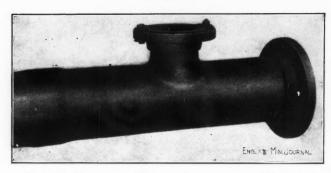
PIPE AND NIPPLE JOINT AFTER WELDING
